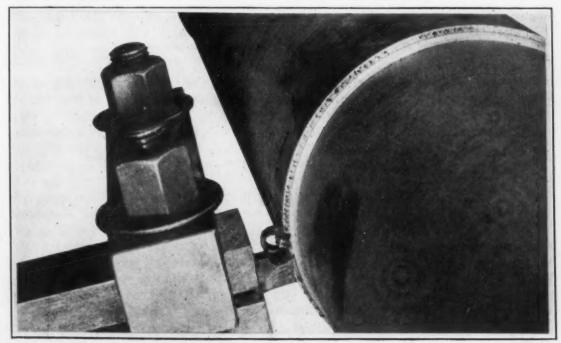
Failure of a tool under test. Shows "glaze" produced on the test log.
